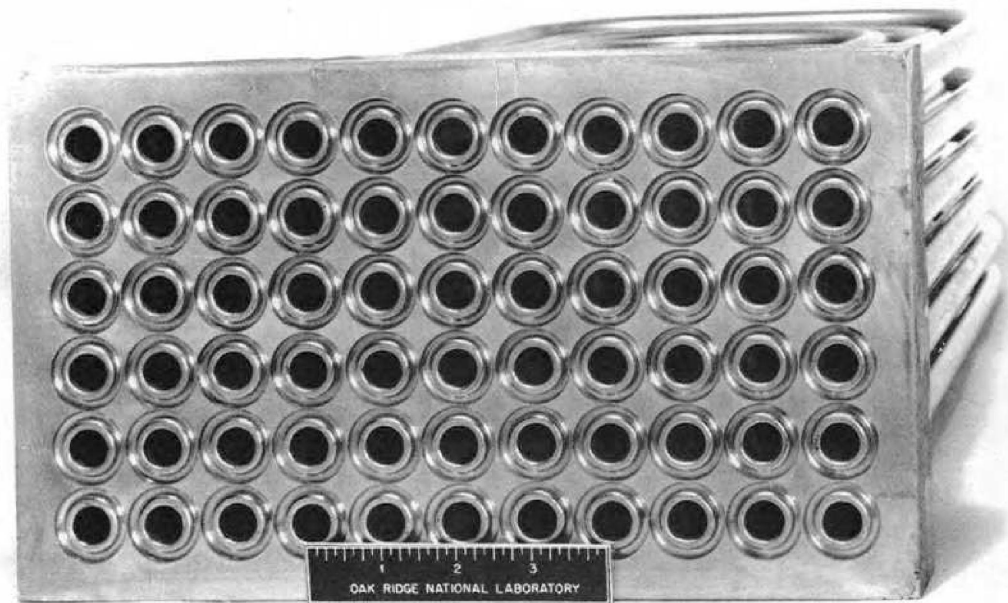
Weld Side of Fill-and-Drain-Tank Sample.
